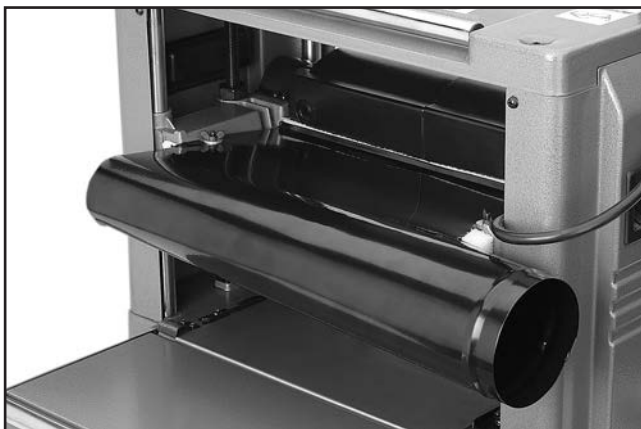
Model H7516 Dust Port installed on the Model G0505 Planer.
